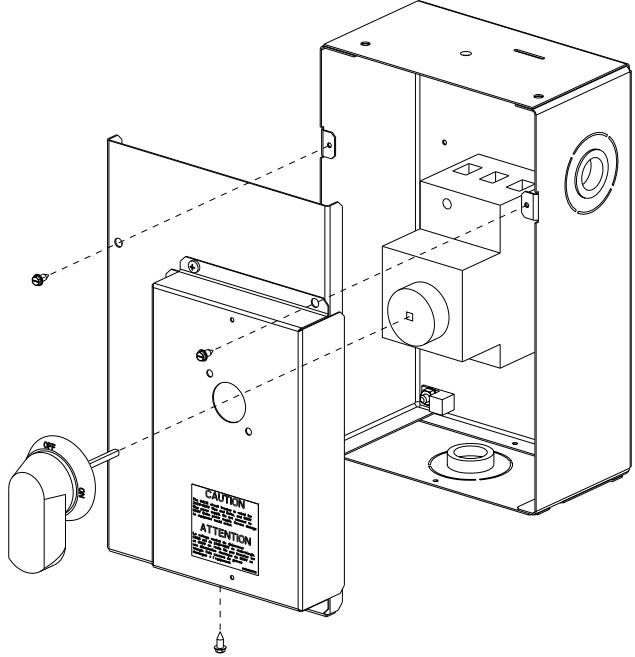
Location of HACR Circuit Breaker Enclosure
